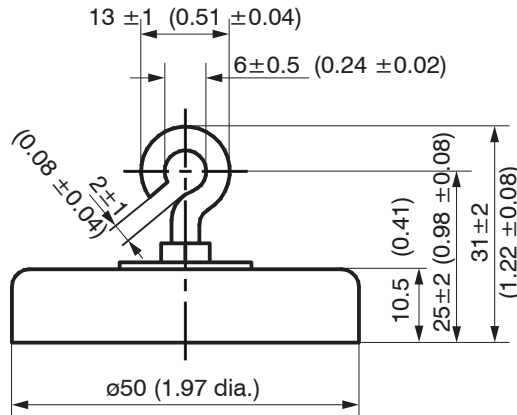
Magnetic holder MH1 - WDS, dimensions in mm (inches)
